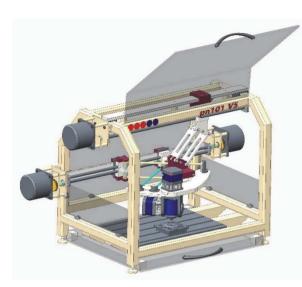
CAD model of mini-laboratory and desktop 5-axis HKMM, pn101_V5
